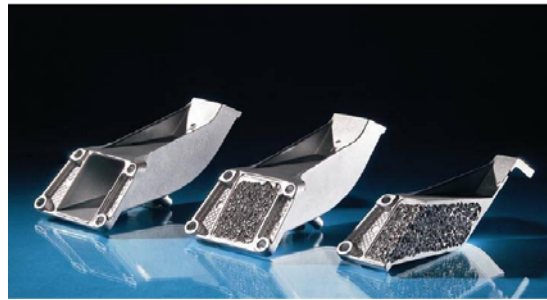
Prototype of a BMW engine-mounting bracket manufactured by LKR Ranshofen. (From left to right: empty casting, entire composite part consisting of foam core and cast shell, section through composite part). (Source: Banhart 2003)
